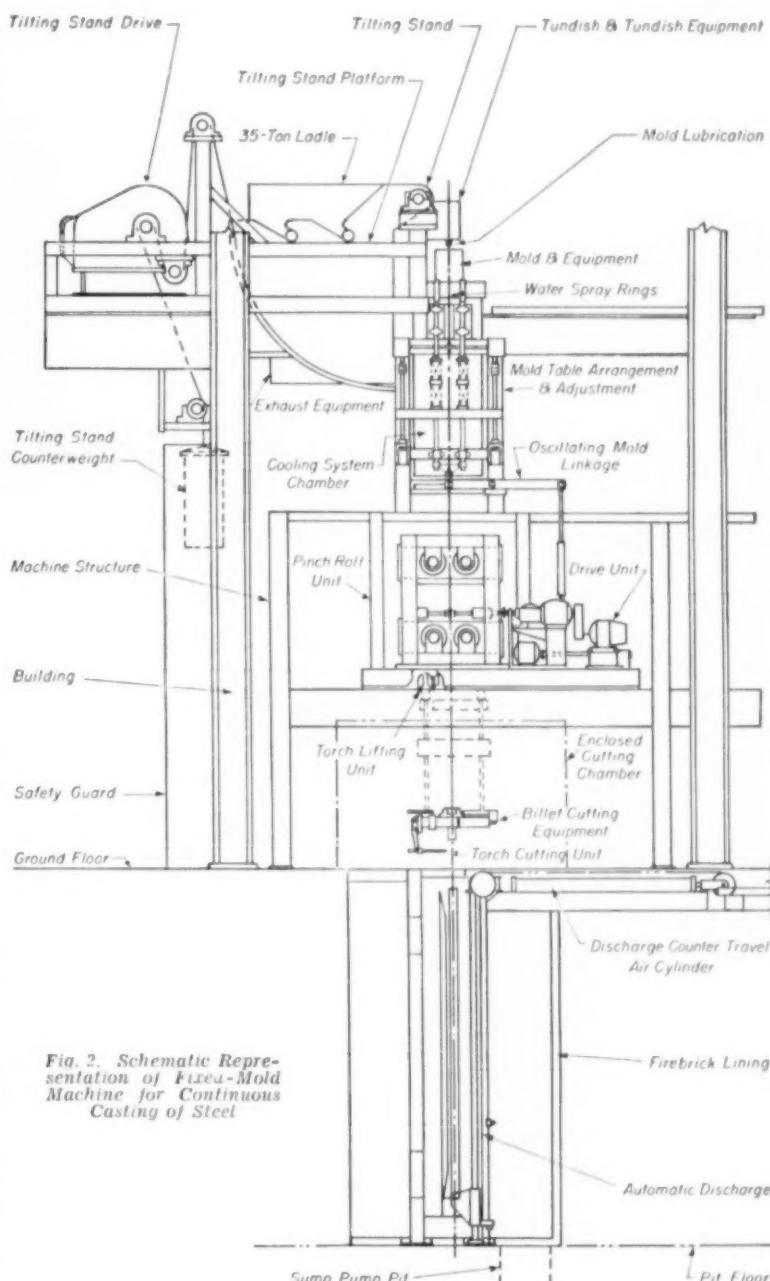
Schematic Representation of Fixed-Mold Machine for Continuous Casting of Steel
